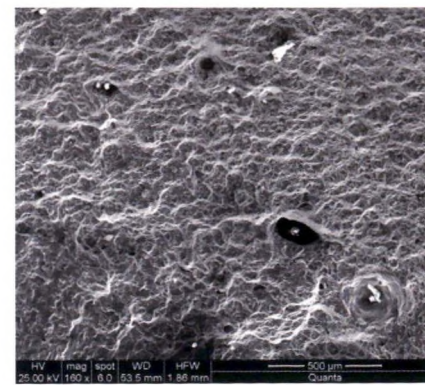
Fatigue fracture of 5A06-O aluminum alloy
